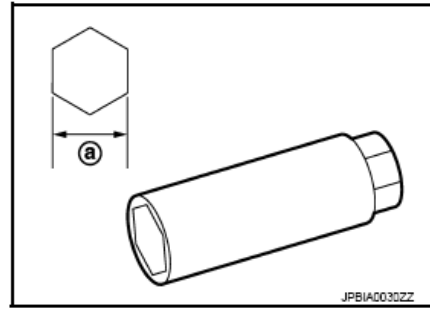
Identifying Spark Plug Wrench Inner Dimension
